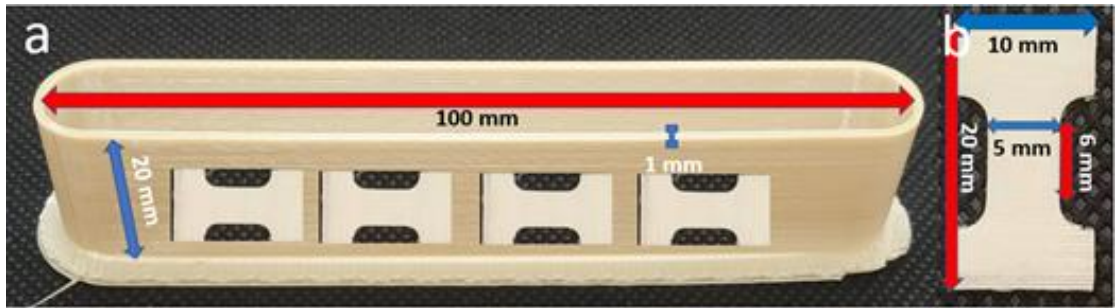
3 (a) Single wall rectangular box (4 samples each set); (b) Machined tensile bar.
